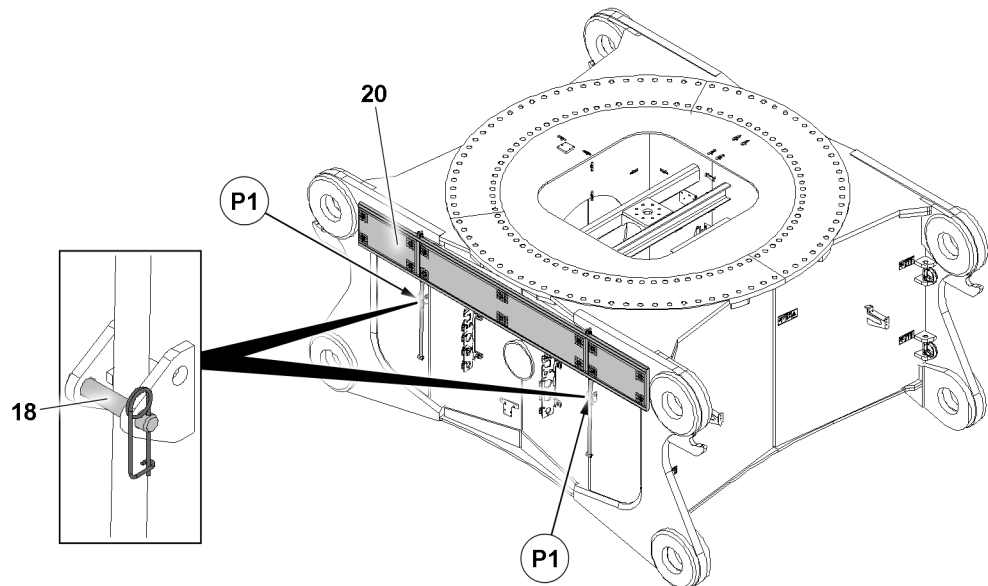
Assembling the grating on the crawler center section in the operating position — folding up the grating
